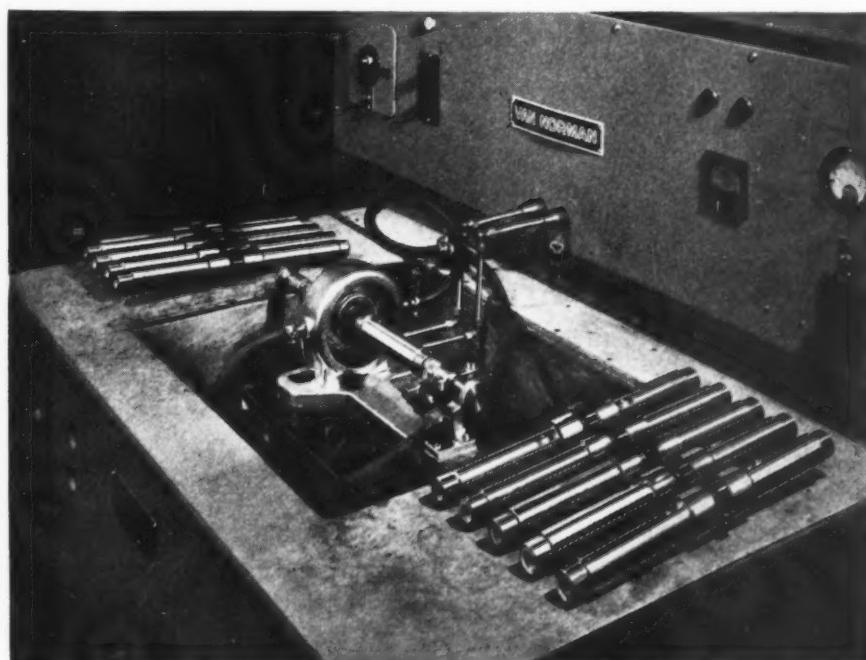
Fixture Arranged for Hardening a Gear that is Cut Integral with Its Shaft
